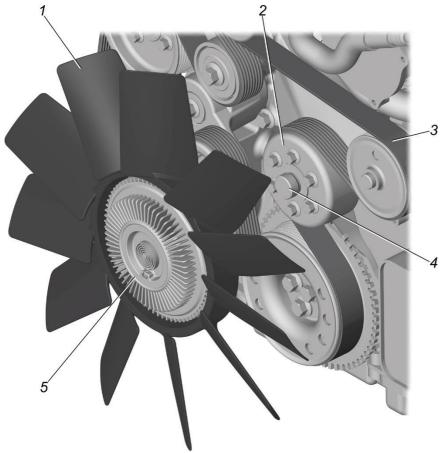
Fan Installation: 1 – fan; 2 – pulley; 3 – attachment drive belt; 4 – fan drive shaft; 5 – viscosity-operated clutch
